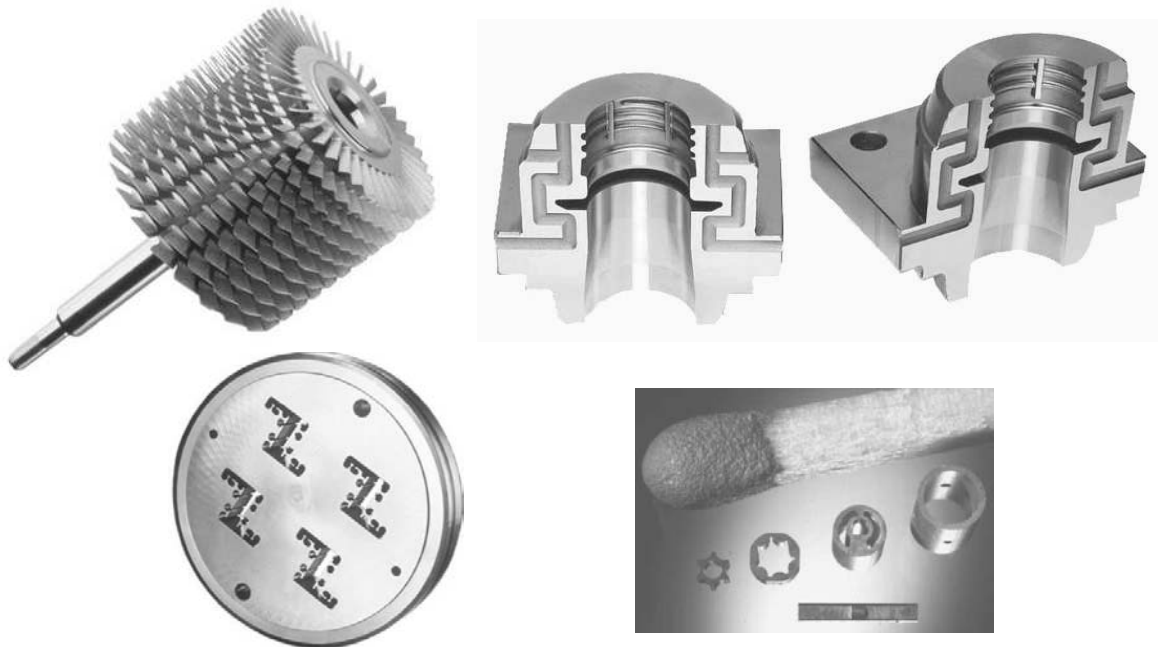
Examples of parts machined with EDM: high speed turbine and mold for the screw thread of PET bottles, produced by die-sinking; die for manufacturing plastic cladding and micro-parts, produced by wire-cutting (images © Agie-Charmilles [1,2]).
